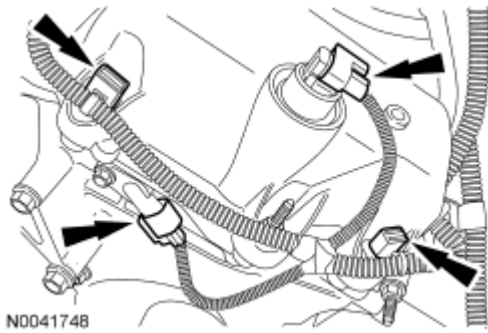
Locating LH Variable Camshaft Timing Solenoid And LH Camshaft Position Sensor Electrical Connectors
